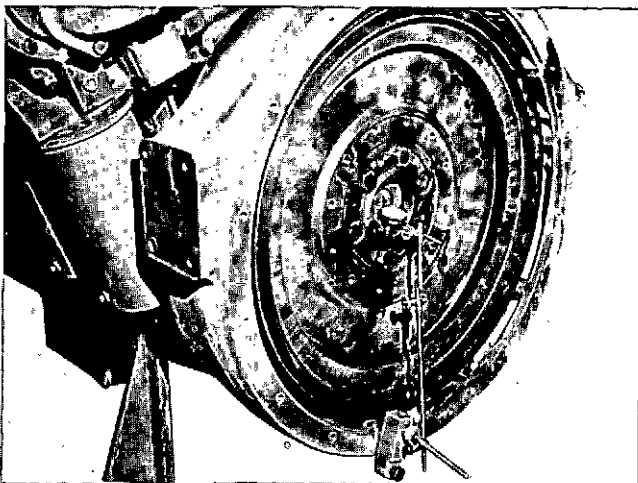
, V414177. Indicating flywheel pilot bearing bore
